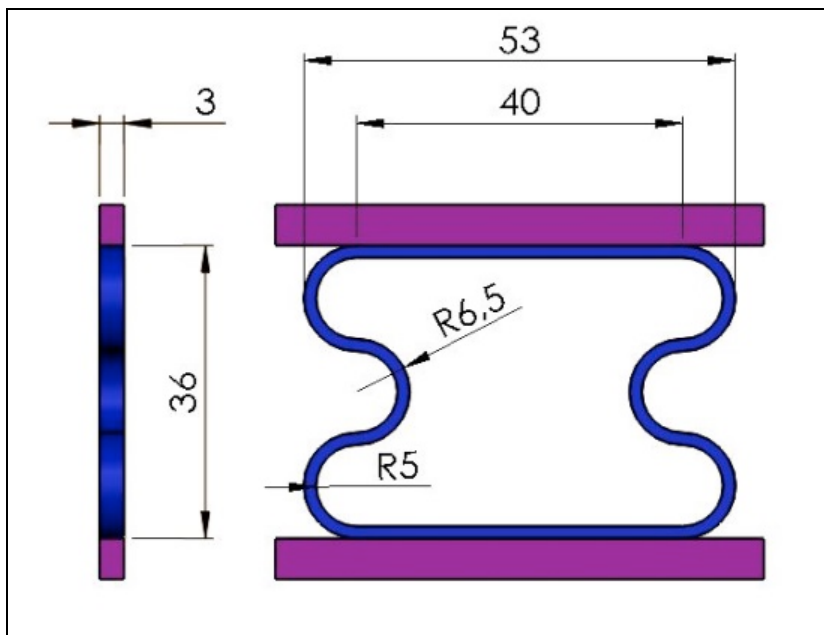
SMA S-shape absorber element geometry. Dimensions in mm.
